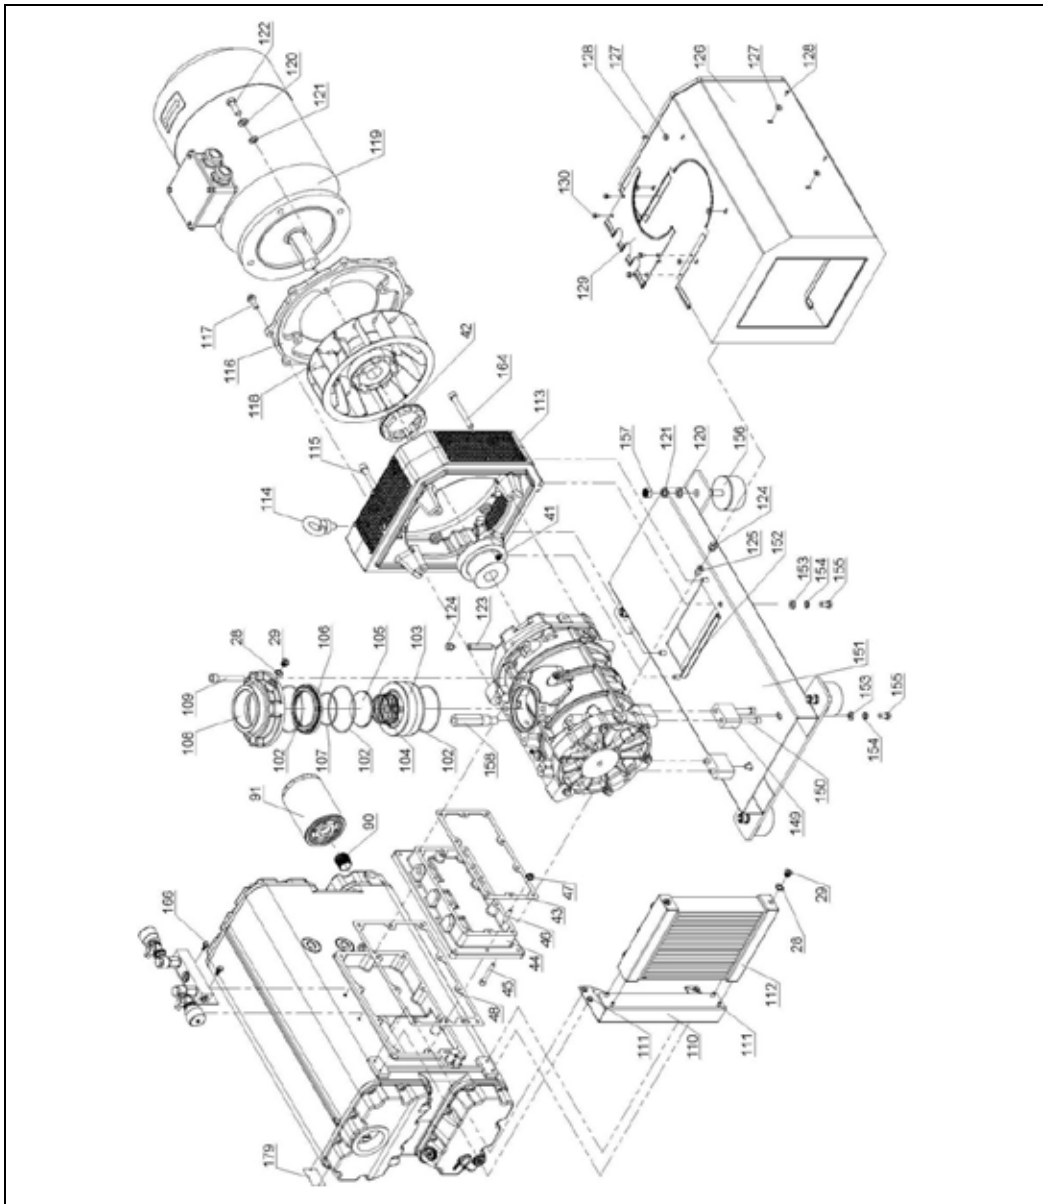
MS-631 Pump parts – Exploded View (1 of 4)
